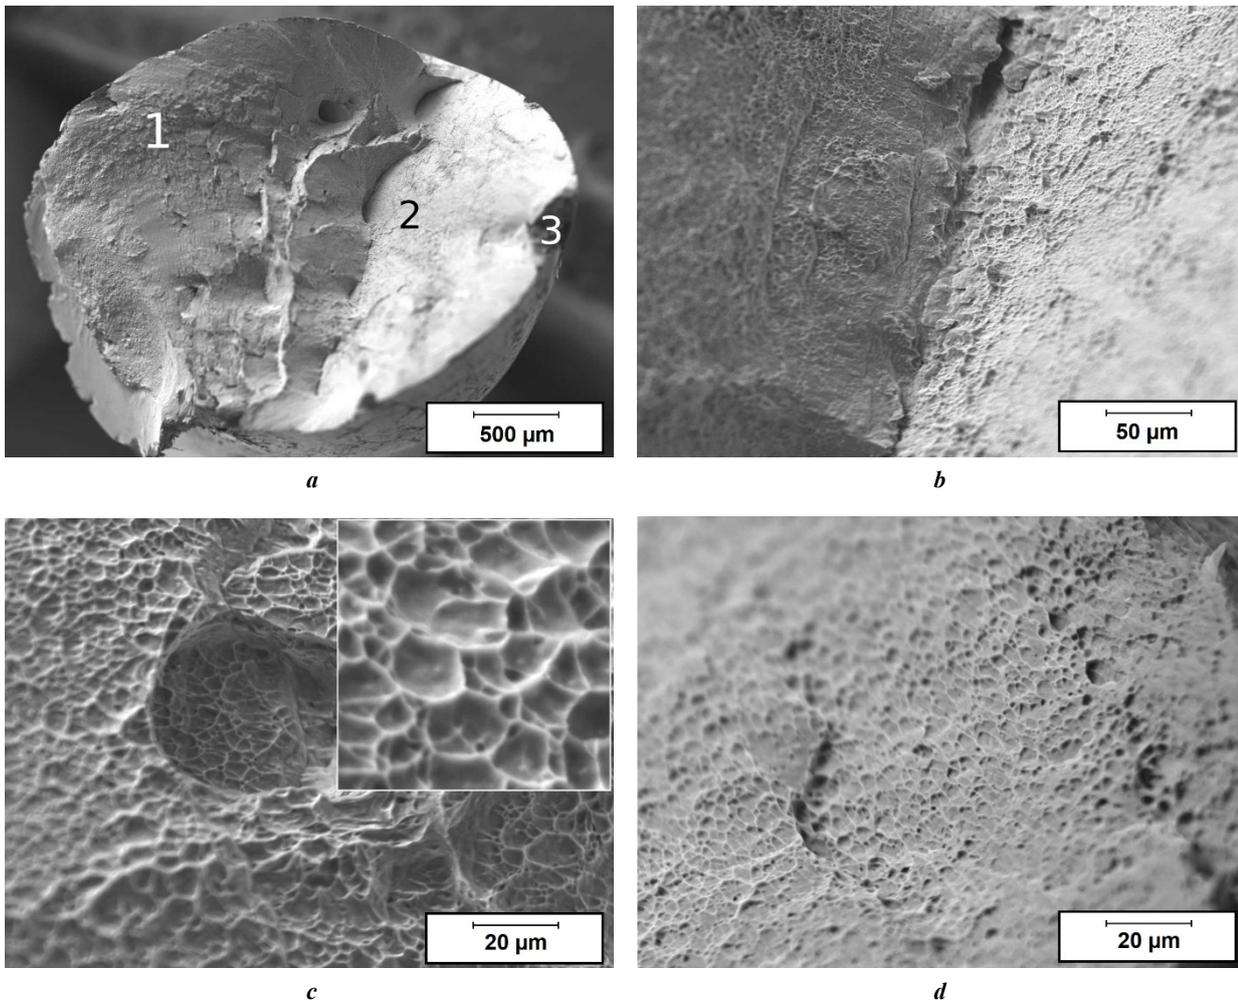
Fracture surface of the bending tests sample of the EMCM alloy in the ECAP-C+CD state, SEM:
